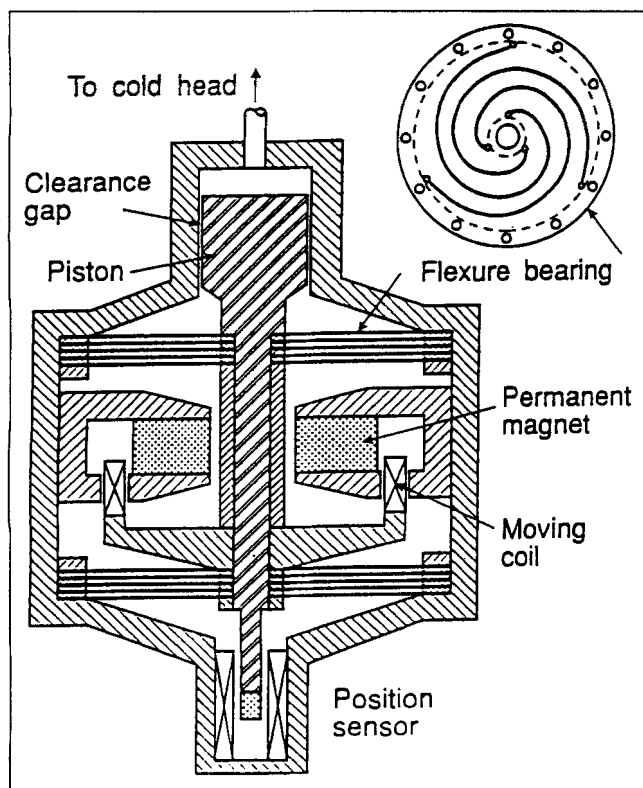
Cross section for an Oxford-type linear compressor using spiral flexure bearings.
